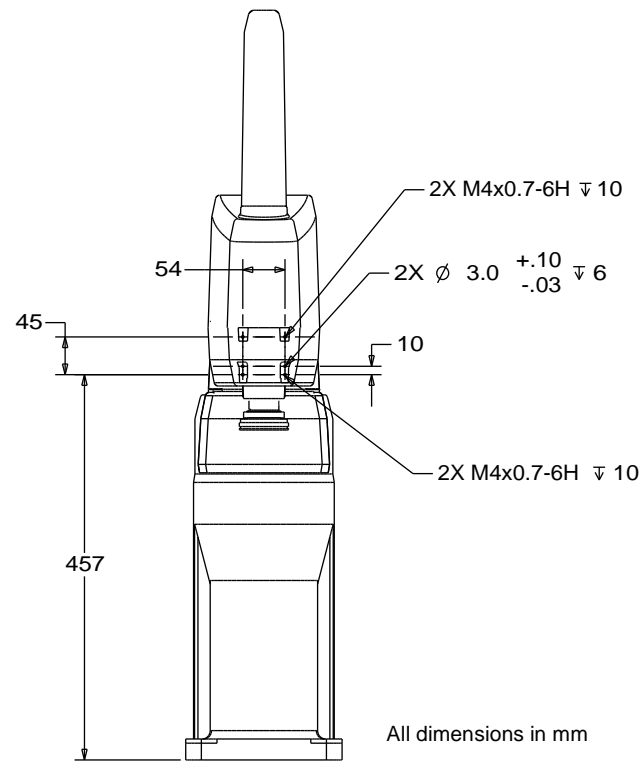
Dimensions of the Camera Bracket Mounting Pattern
